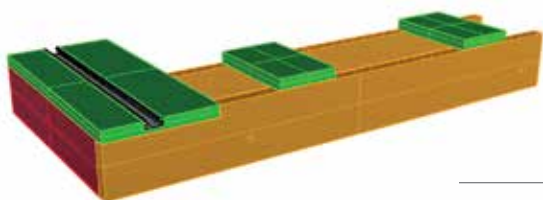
The jig used for truing the outer rim had T-track running parallel to the lathe's bedways. Note: This part of the jig is shown in use in Photo 4.
